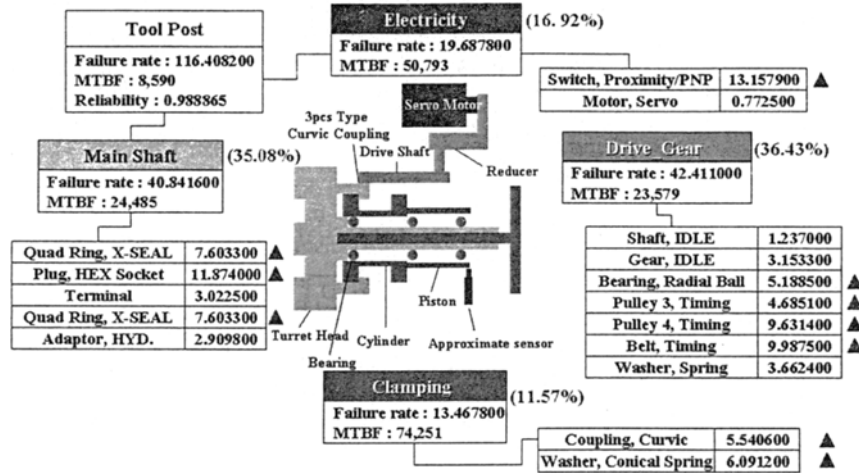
Analysis of the sub-assembly and main parts of the tool post.
